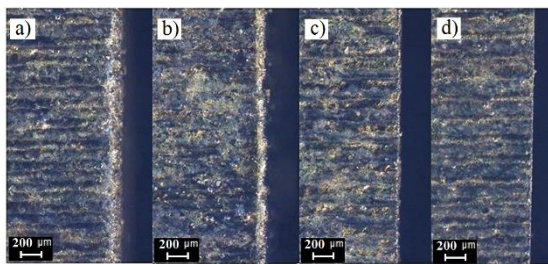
Optical microscope (X100) images of the ZrB₂ coated samples after cutting processes; a) Abrasive water jet, b) Laser, c) Wire-cut electrical discharge machining, d) Abrasive disc
